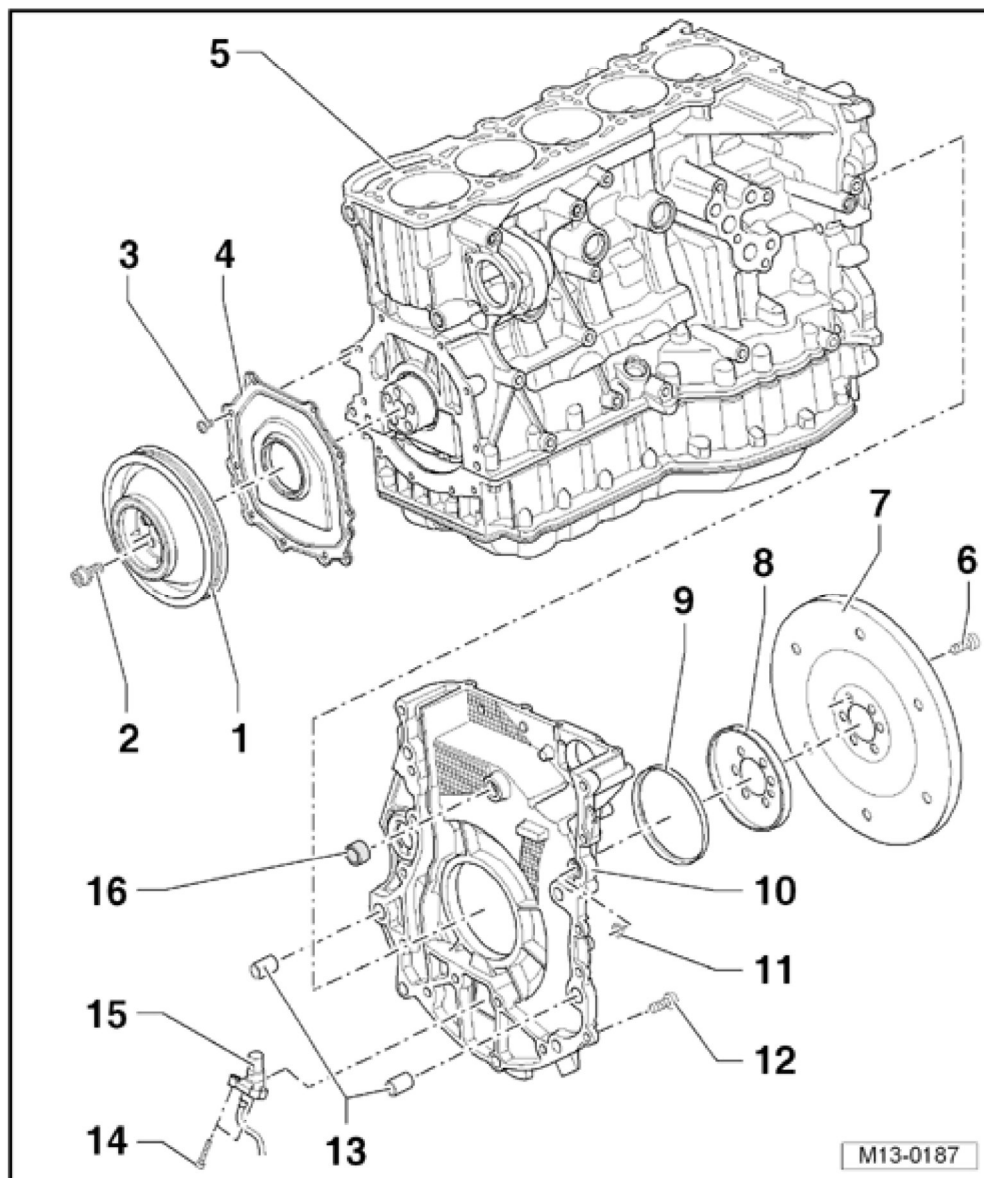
Identifying Sealing Flange And Drive Plate/Flywheel Overview
